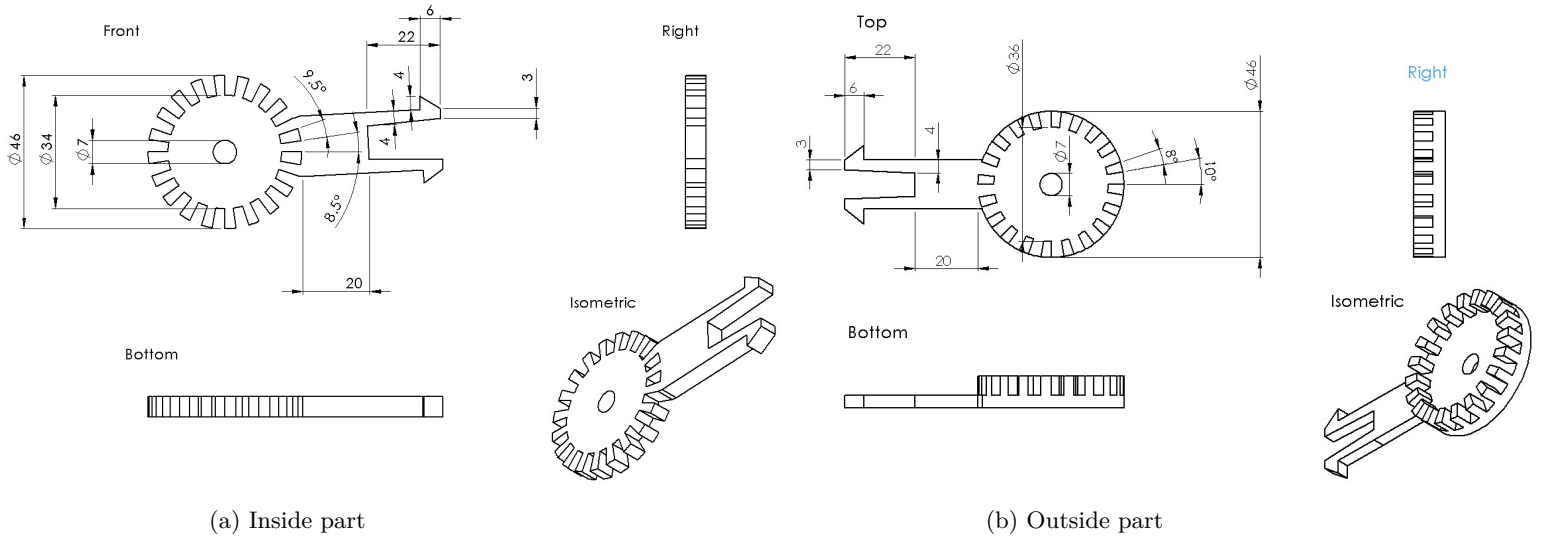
Technical drawings of the Large model of the blocking hinge design.
